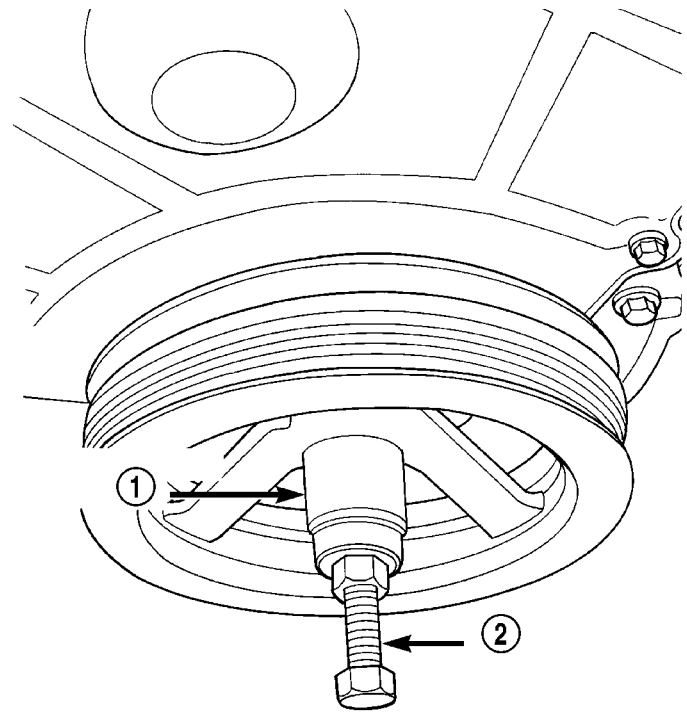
CRANKSHAFT DAMPER - INSTALLATION
